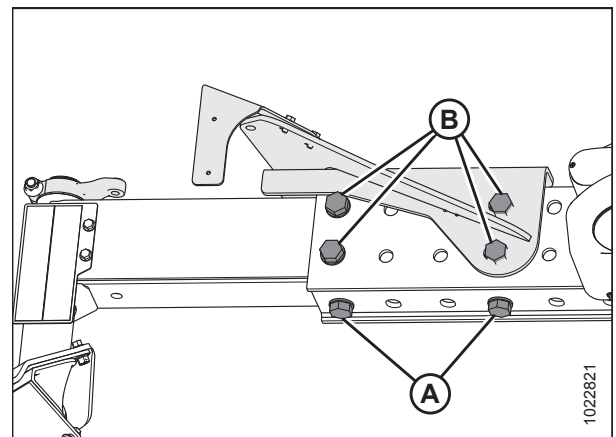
Torquing Bolts (Left Wheel Shown)
